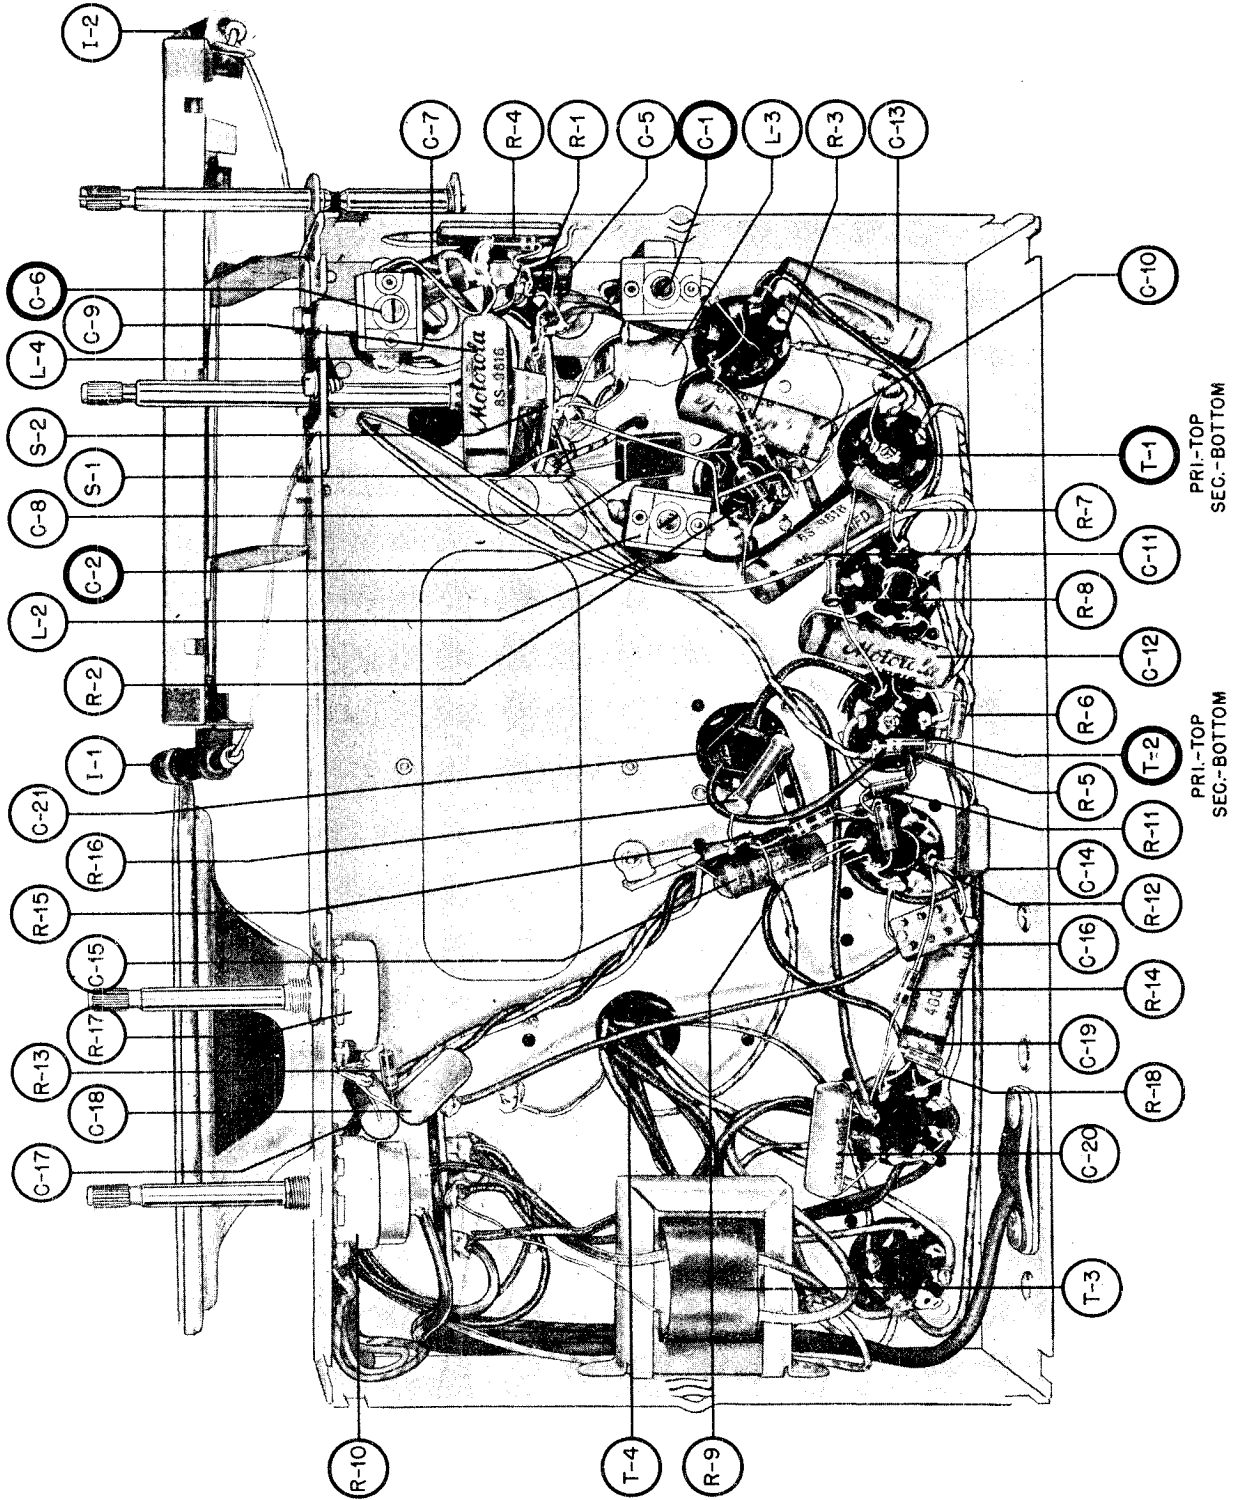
TUBE & TRIMMER LOCATION DETAIL
